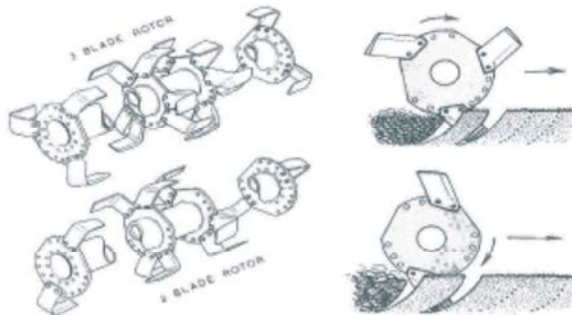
Rotary tiller rotors with L-type blades showing methods of mounting and cutting action [3]
